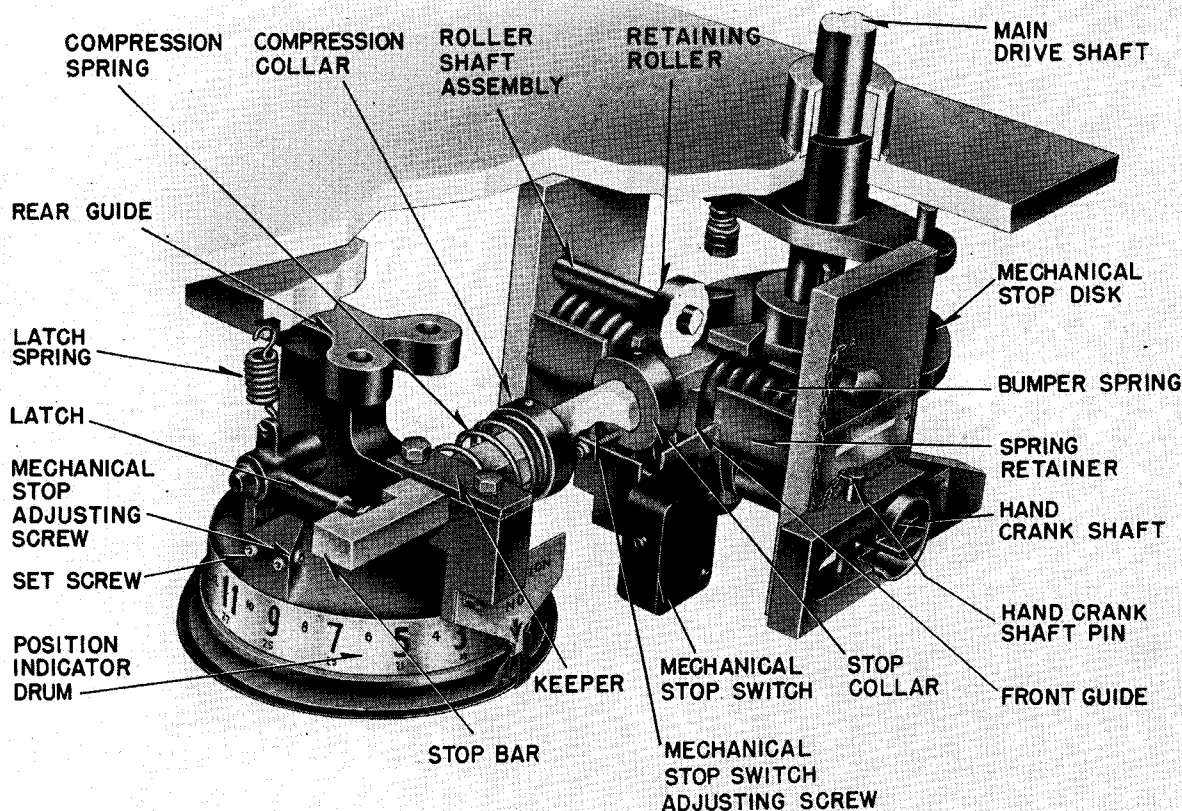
Cutaway View of "URS" Tap Changer Mechanical Stop
